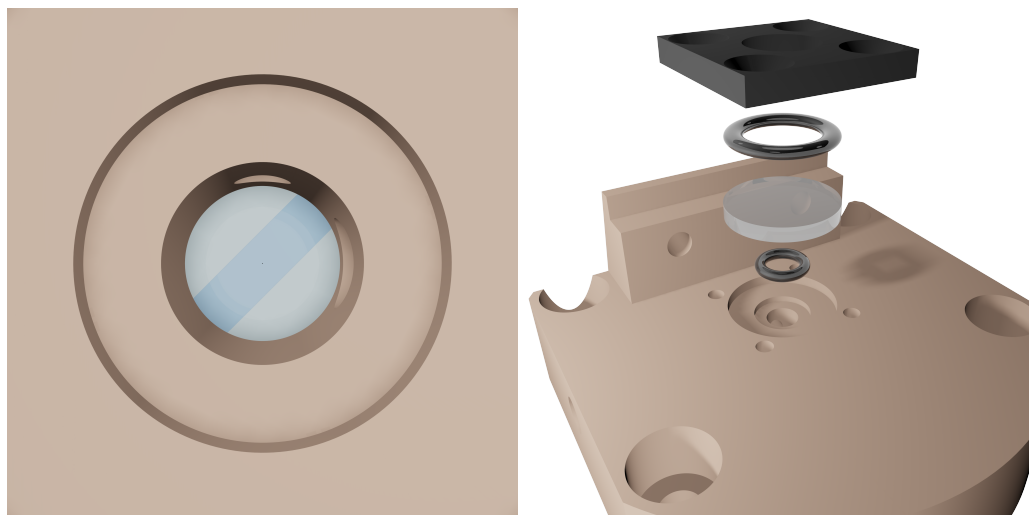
Top view through the hole in the center of the PEEK housing onto the surface area of the patterned sample that is exposed to a liquid electrolyte (left) and an exploded view on the components that seal this hole under experimental conditions (right).
